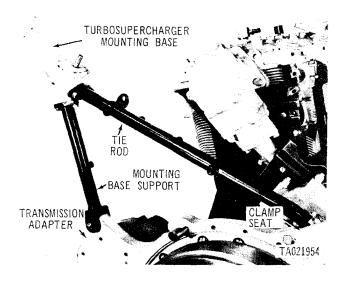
Removing or installing turbosupercharger mounting base, tie rod and base support.
